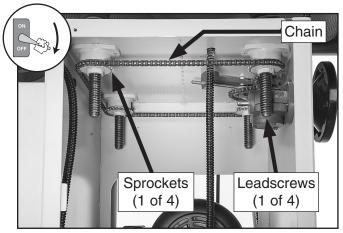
Location of table elevation leadscrews, chain, and sprockets (lower left access panel removed).
